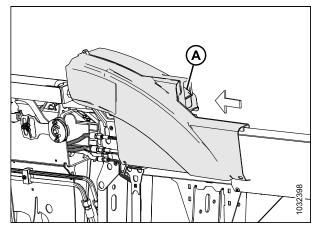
Right Outboard Linkage Cover – View from Rear of Header
